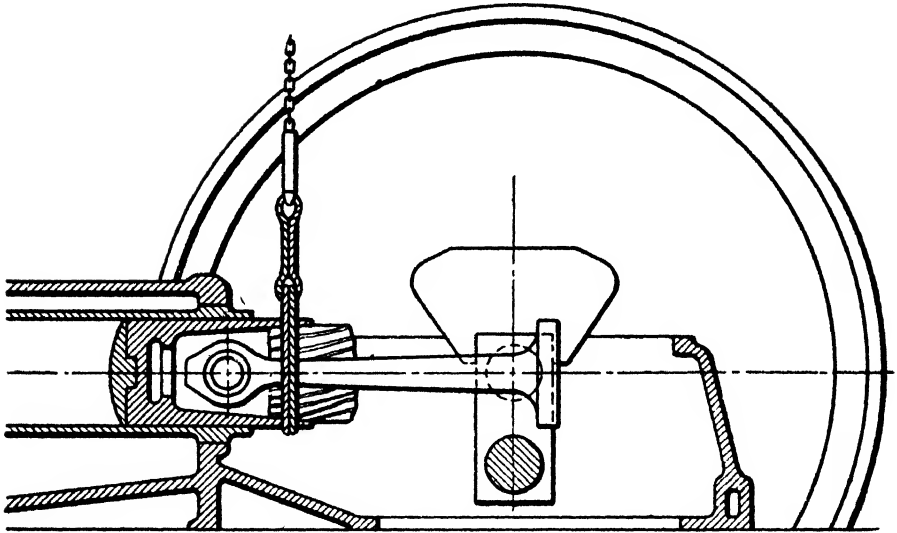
CONNECTING ROD OF CRANKSHAFT IN HORIZONTAL POSITION TO FACILITATE SLINGING BY MEANS OF HARDWOOD WEDGES
